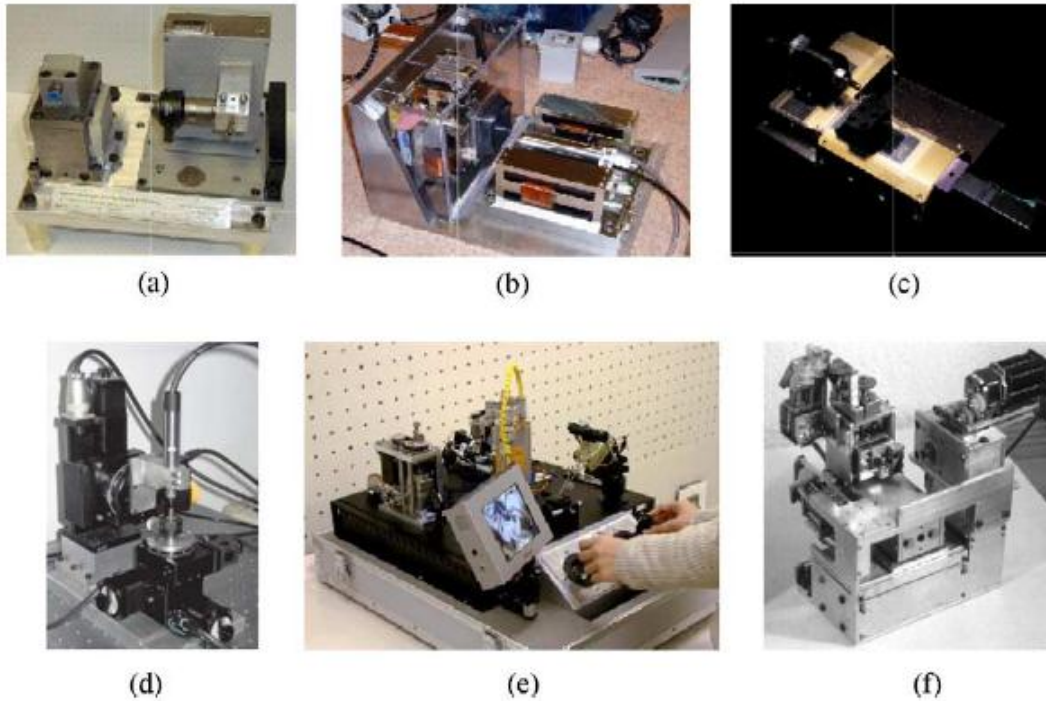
Micro-machines (a) micro-factory; (b) 2nd.generation miniature machine; (c) commercial miniature machine; (d) miniature machine; (e) micro-factory; (f) micro-machine tool.
